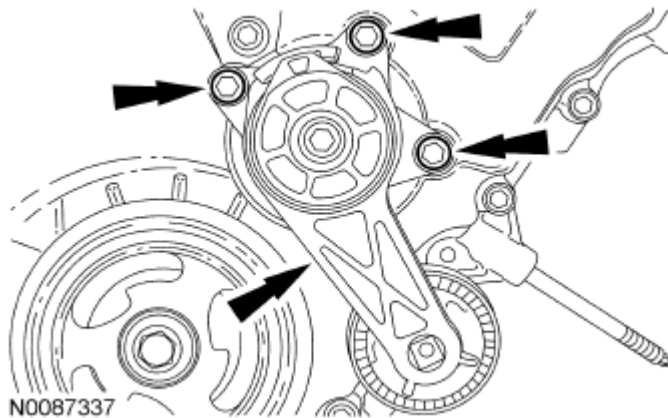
Locating Accessory Drive Belt Tensioner With Bolts
